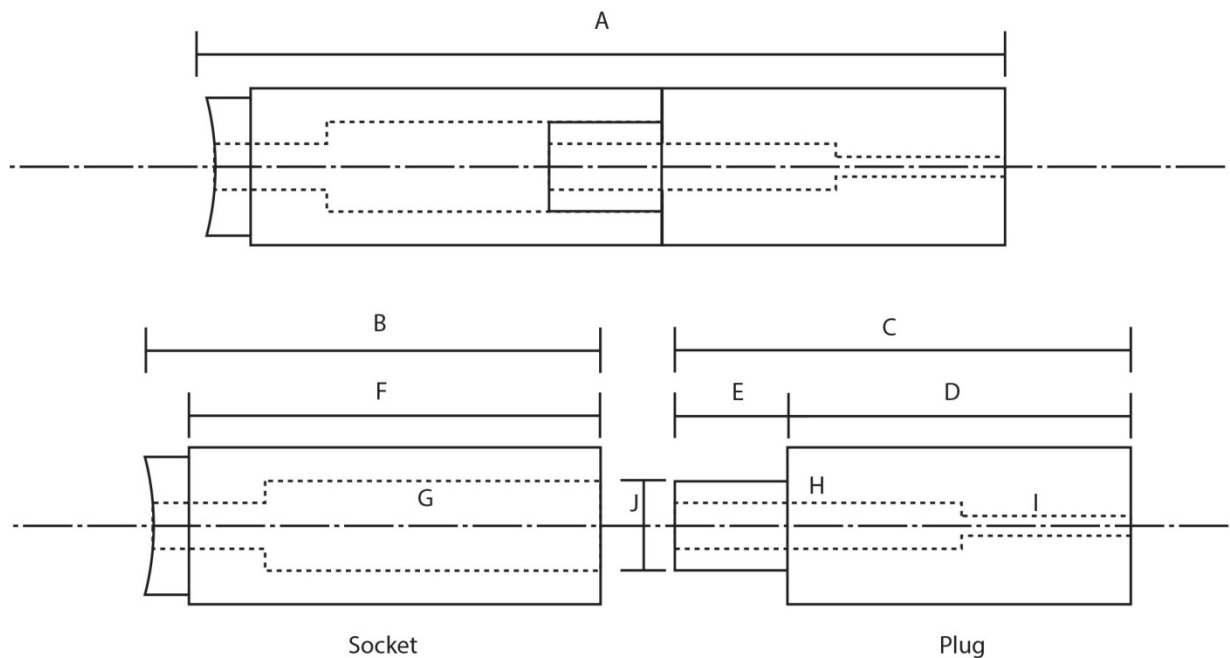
Cartoon drawing of sensor housings. The top drawing represents the assembled plug and socket. The lower left-hand drawing is the socket. The lower right-hand drawing is the plug. Drawing is not to scale. Letters correspond to dimensions shown in Table E.1-1. Dashed lines indicate drilled sections of the interior and corresponding measurements. Semi-dashed lines indicate the centerline.
